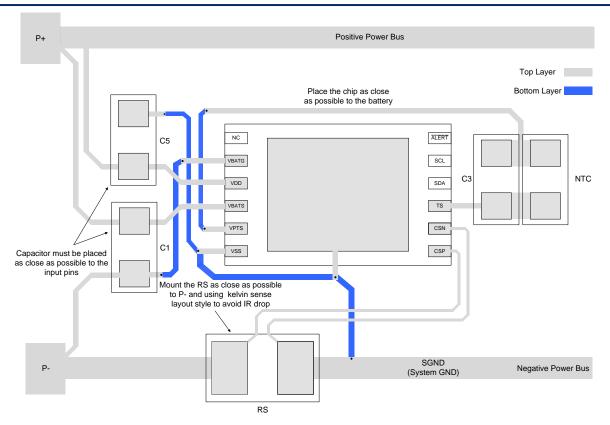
PCB Layout Guide for WDFN-12L 2.5x4 Package
